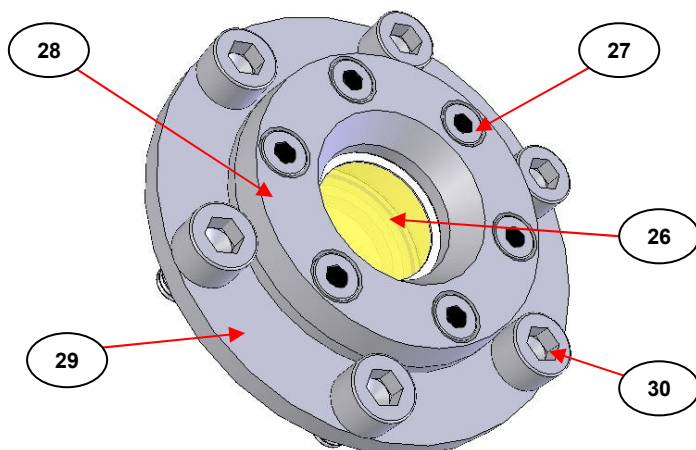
Pressure Certified ZnSe Window Housing Assembly (11)
